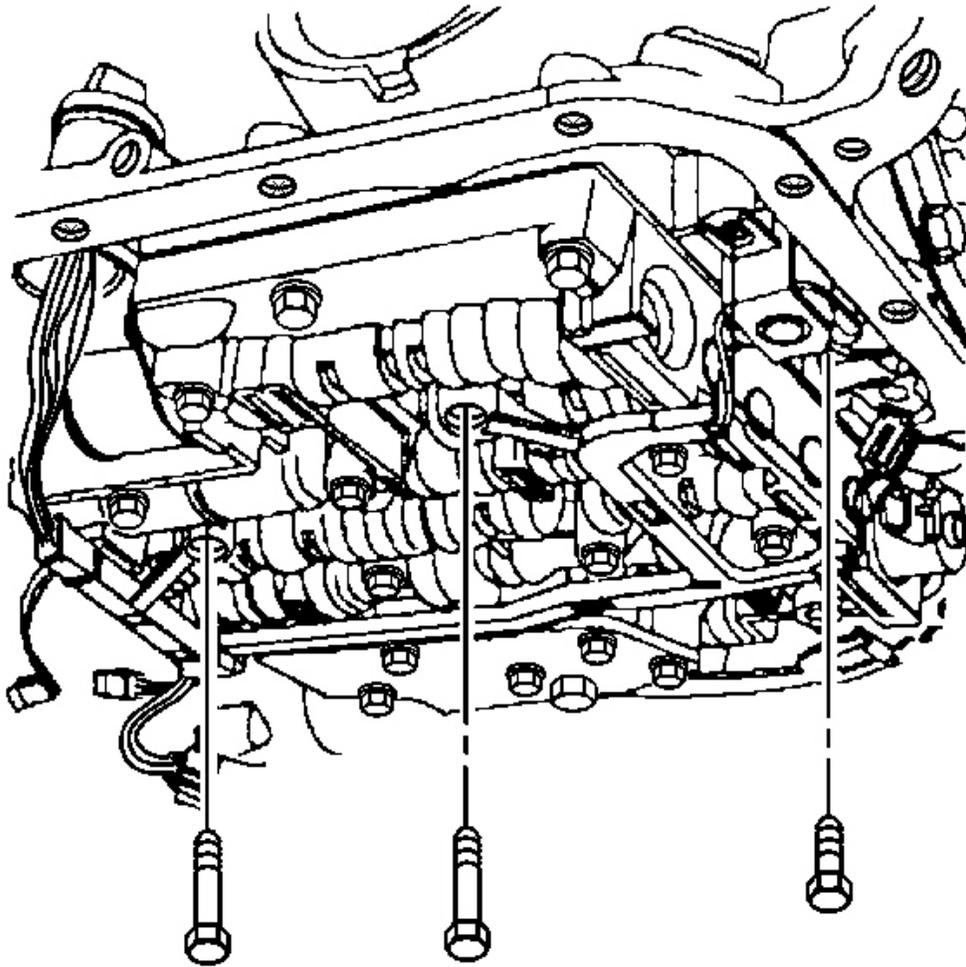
TCC Solenoid Bolts, Valve Body Bolts & Internal Wiring Harness
